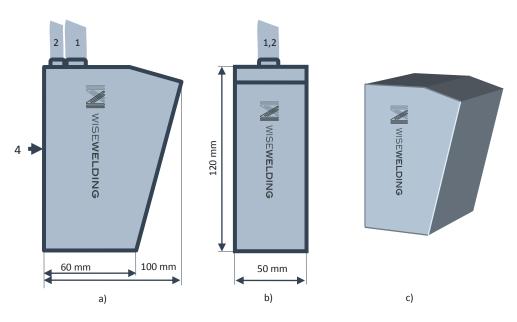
standard Wise WELDING module dimensions: a) side view, b) front view, c) 3D view; 1 cabling, 2 cooling media connection, 3 module body, and 4 robot mounting spot
